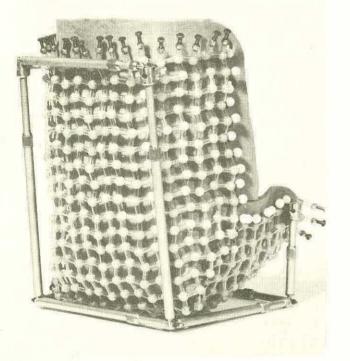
SUPPORT SURFACE OF ELEMENTAL PARTS
